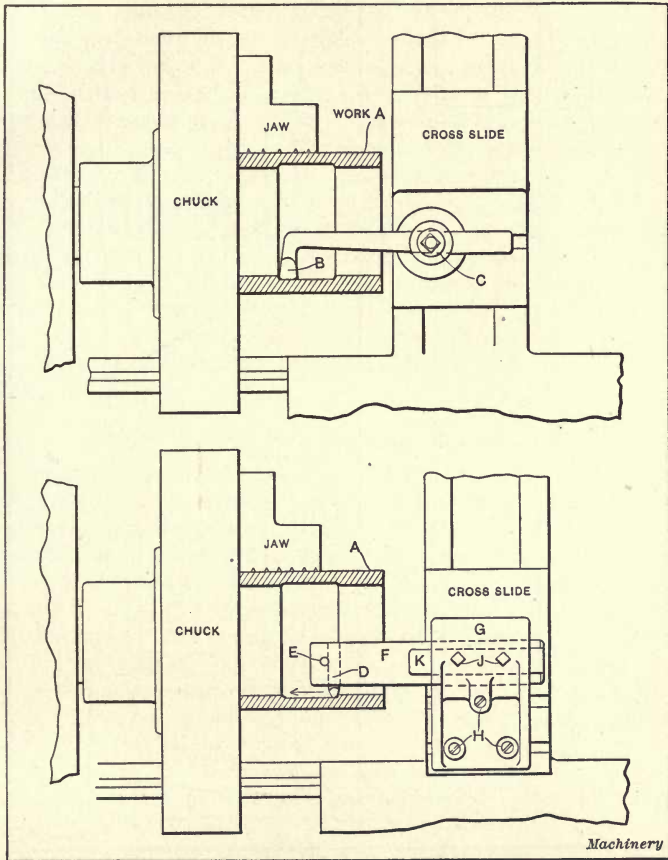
Two Simple Types of Recessing Tools for the Engine Lathe
